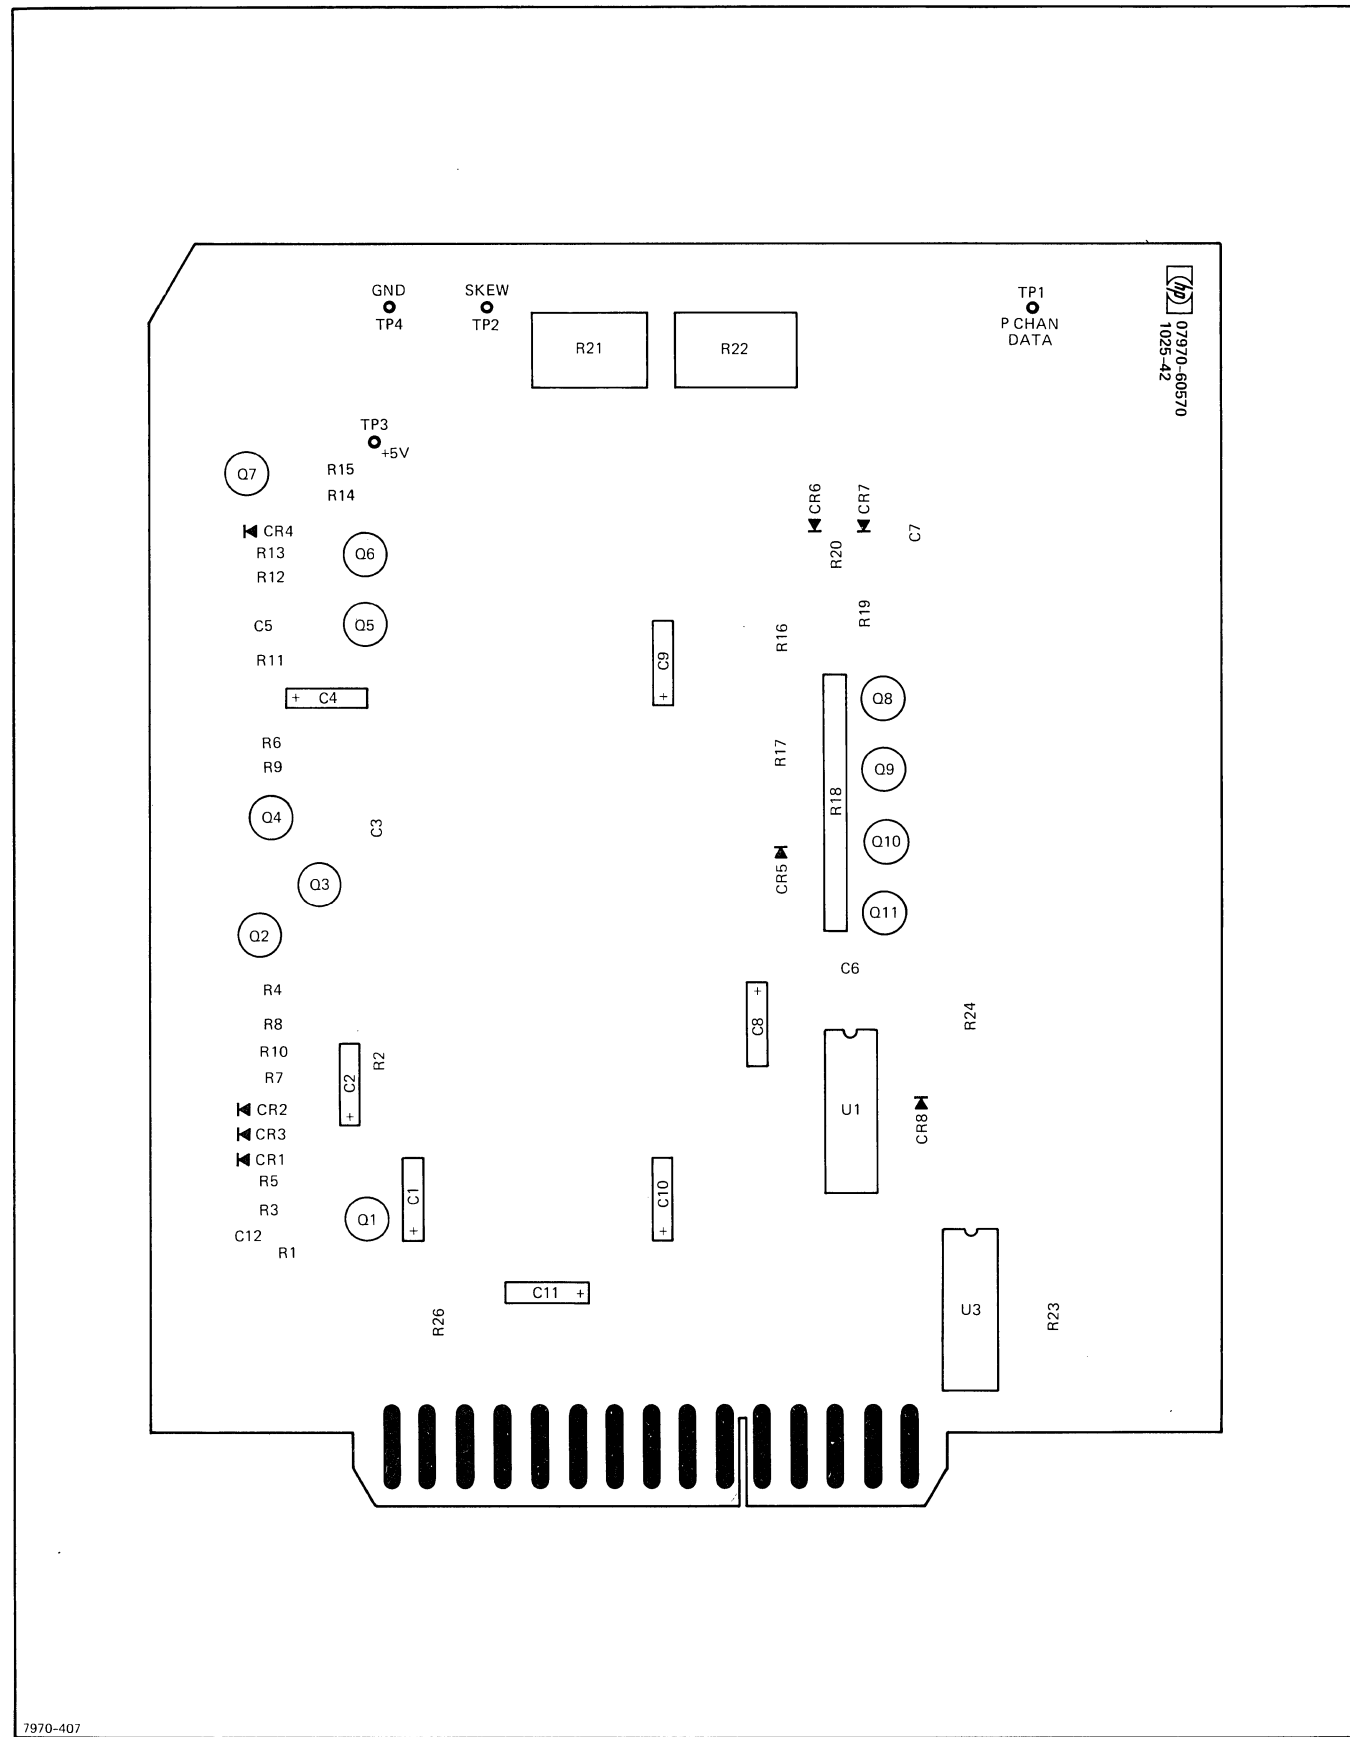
Single-Channel Read Data PC Assembly A18A2 (21 - 45 IPS), Parts Location Diagram
